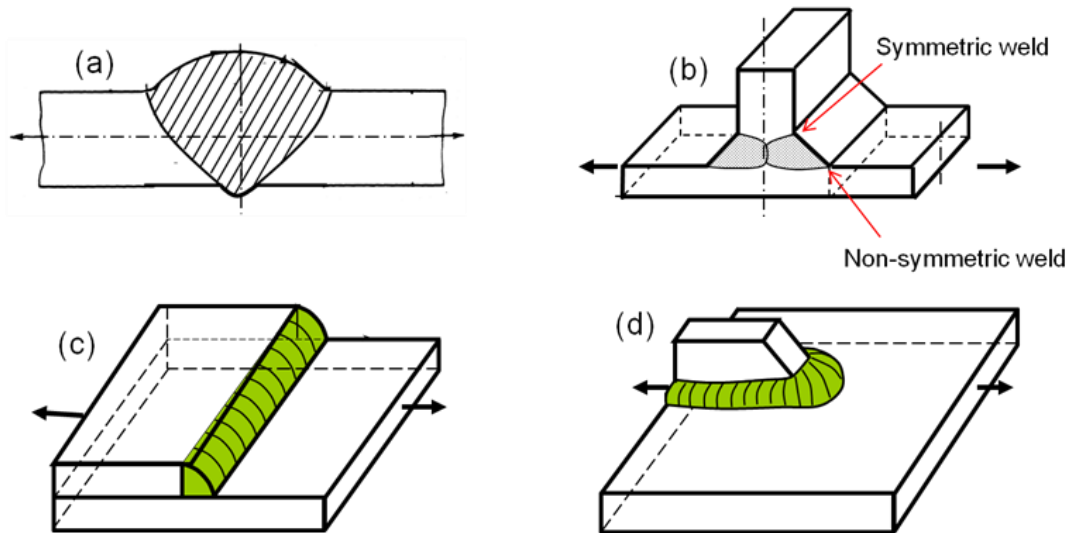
Examples of geometrically non-symmetric welded joints
